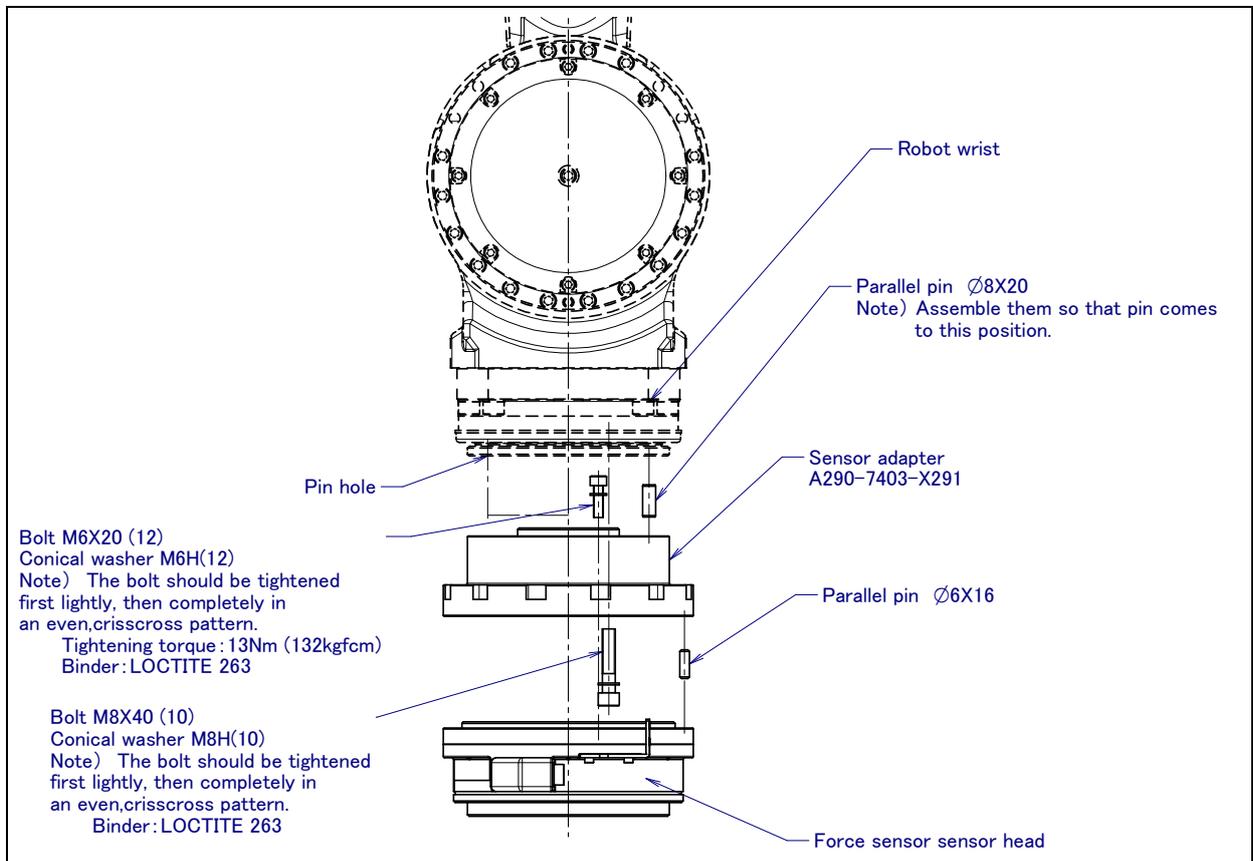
(e) Replacing the force sensor, sensor head and adapter (R-1000iA/80F+FS-100iA)
